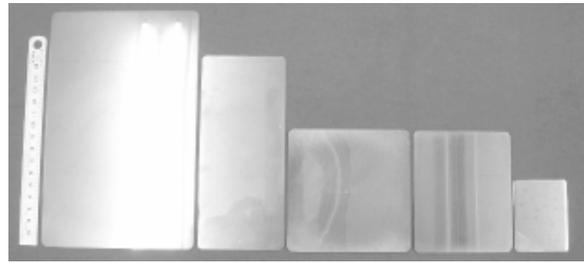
Outer shape of the glassy alloy sheets with dimensions of 0.3-2x125x200 mm.
